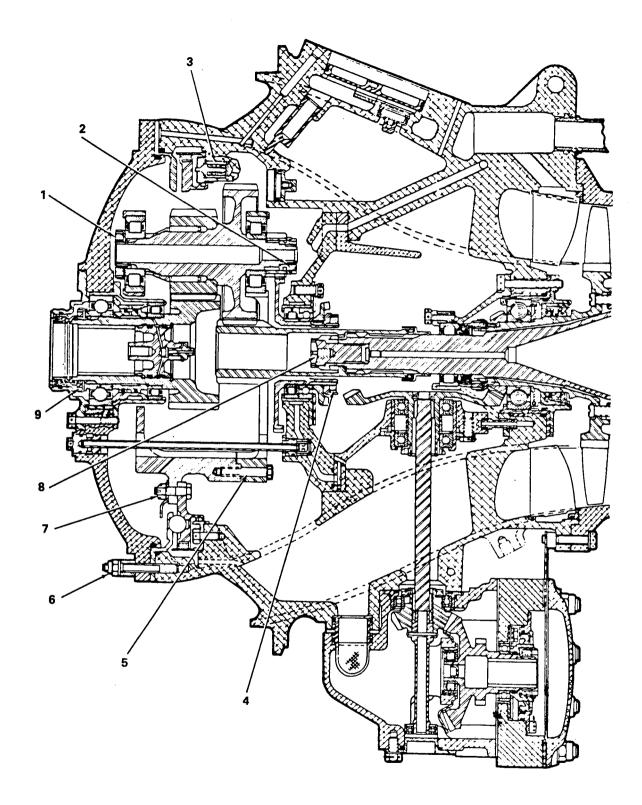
Special Torque Value Locations (T53-L-11 Series Engines) (Sheet 1 of 6)
